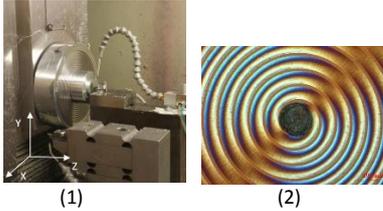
(1) Spiral-cutting experiment setup (2) Machined surface.
